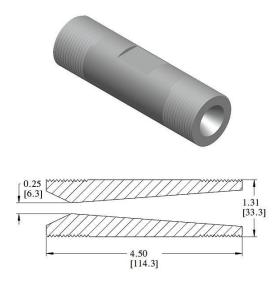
S-8. Schematic of the Sonic Nozzle with Cutaway View Showing Converging and Diverging Interior Sections
